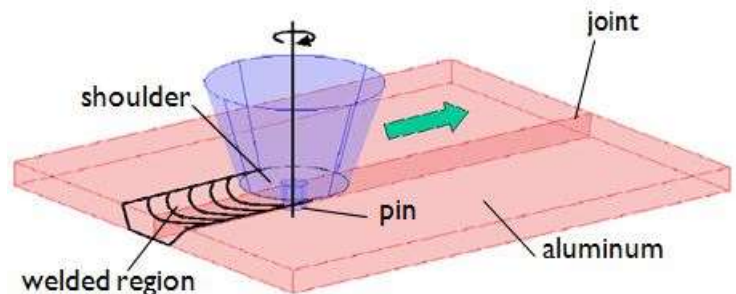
Two aluminum plates being joined by friction stir welding.
